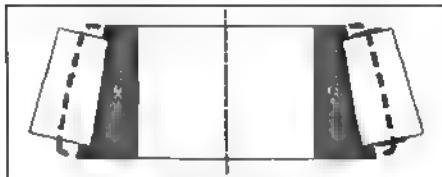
The areas to be grease-packed prior to installing a two-piece roller-thrust bearing.
